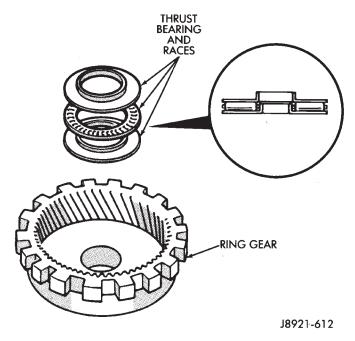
Removing/Installing Ring Gear Thrust Bearing And Races
